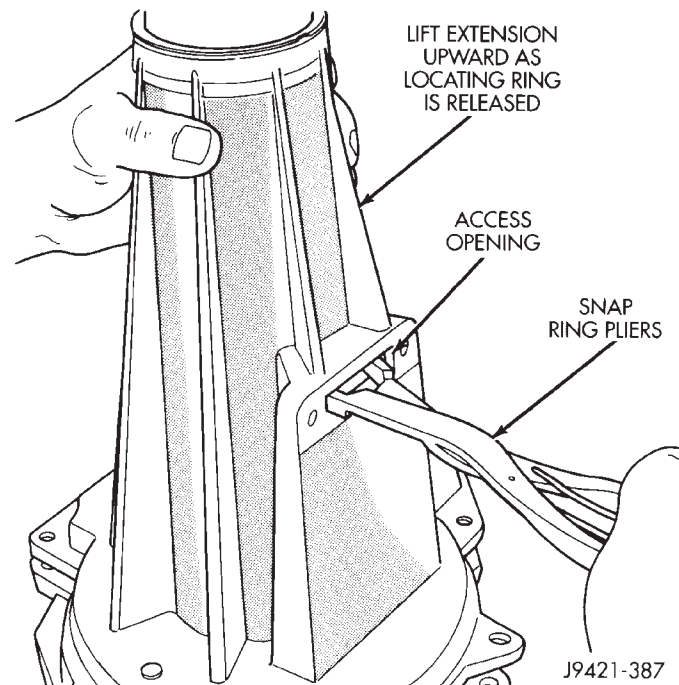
Releasing Mainshaft Bearing Retaining Ring
